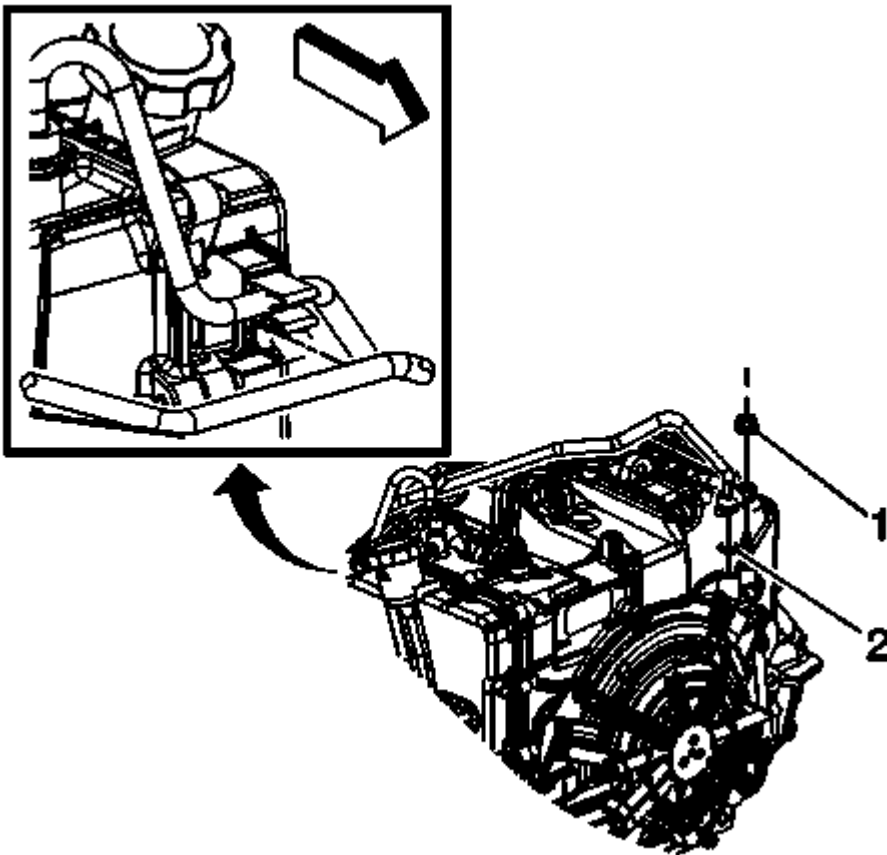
Identifying Transmission Fluid Cooler Pipe Components
